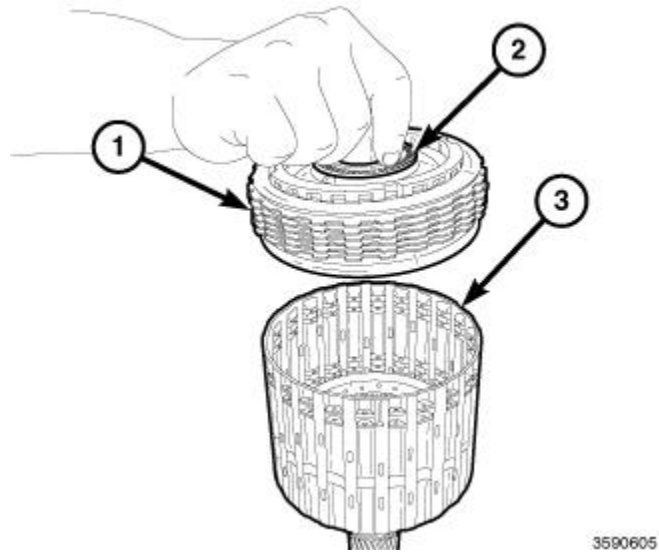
E-Clutch & P4 Sun Gear/C/E Clutch Retainer
